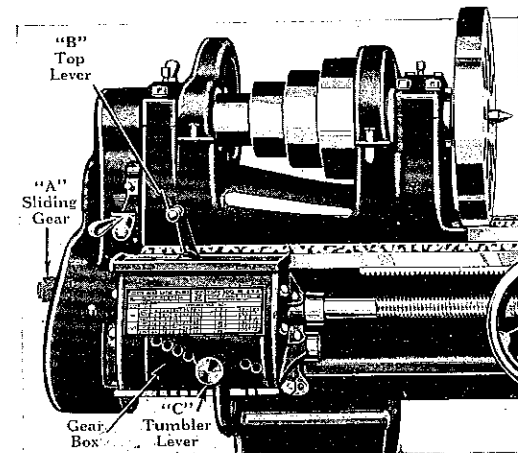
Quick Change Gear Mechanism used on all South Bend Quick Change Gear Lathes. (See Gear Box Description on Page 41)
